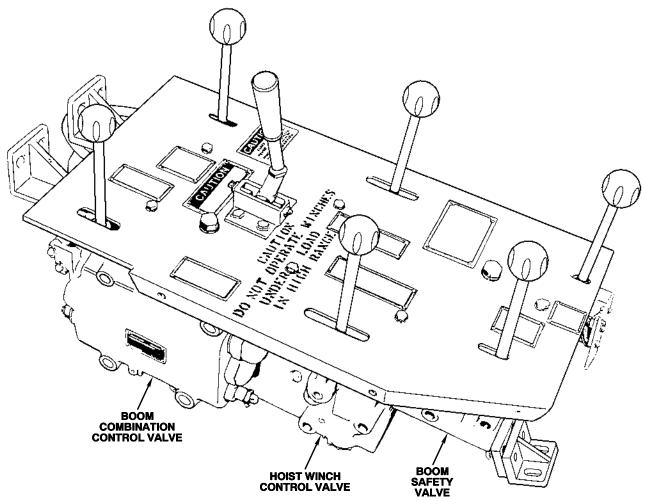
Hydraulic Subplate Assembly—Left-Rear View.
